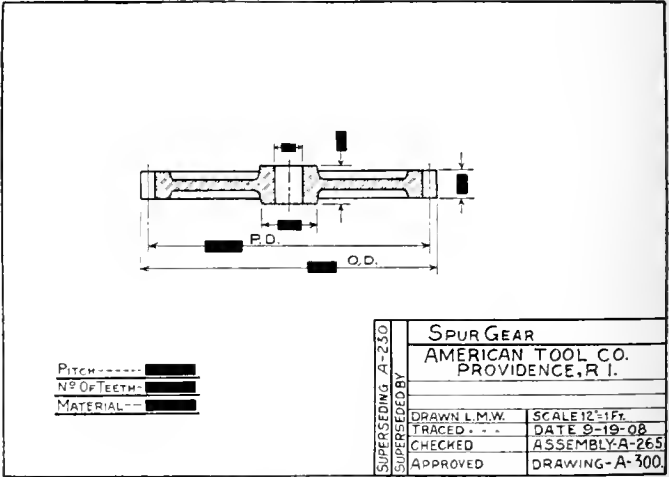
Printed Sheet with Representation of Commonly used Part and Blank Spaces to be filled in by the Draftsman
